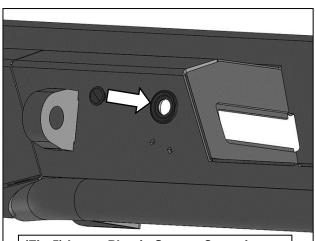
Frame mounting location after bumper removal (passenger/right side pictured)
